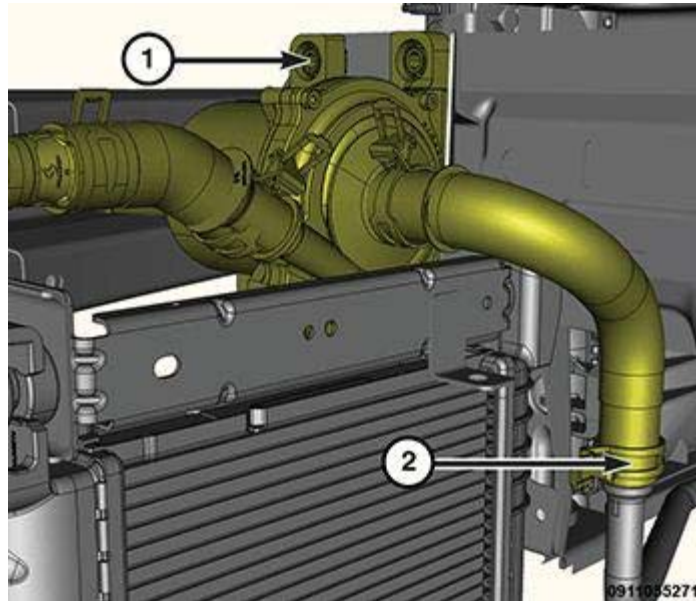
Coolant Pump To Mounting Bracket Nuts & Clamp
